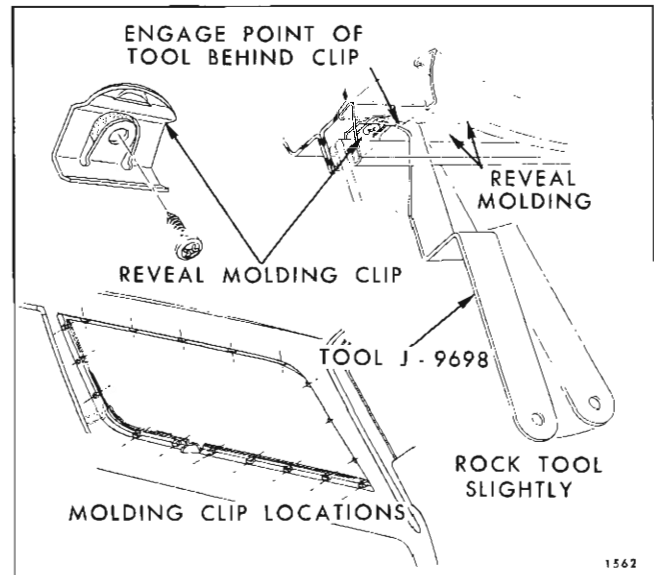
E36—Rear Quarter Window Reveal Molding Removal
